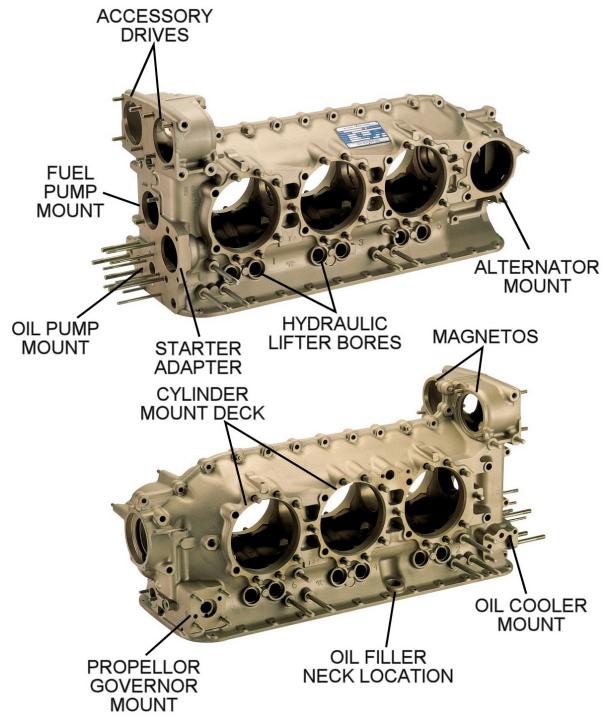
520/550 Permold Series Crankcase Photo View
